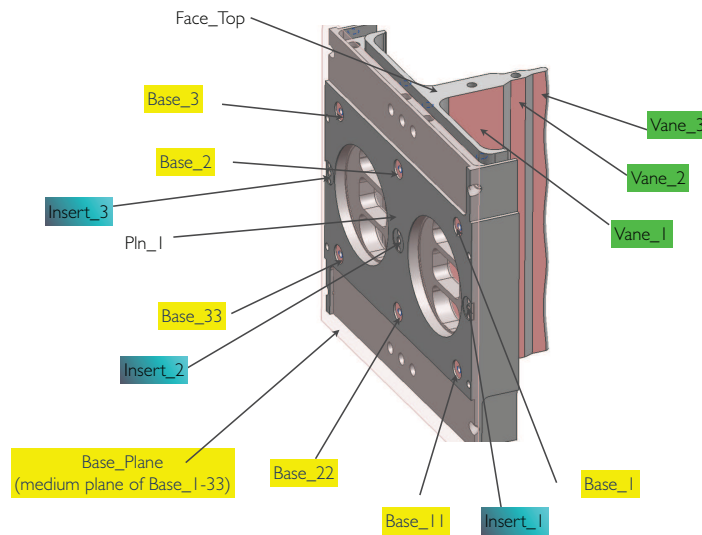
Definition of the surface for the dimensional check in a E piece.
